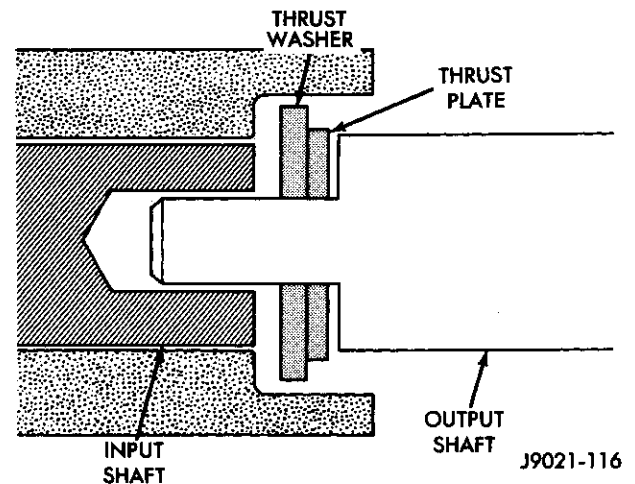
No. 3 Thrust Washer And Output Shaft Thrust Plate Position
